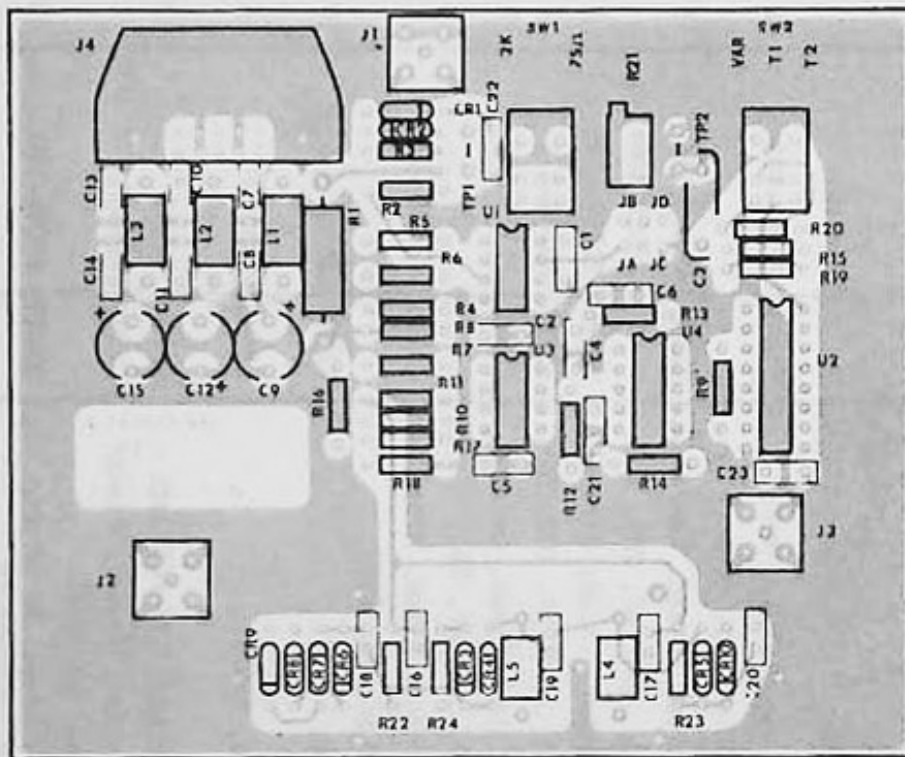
IF Blanker Circuit Card Assembly (A11) Component Location Diagrams
